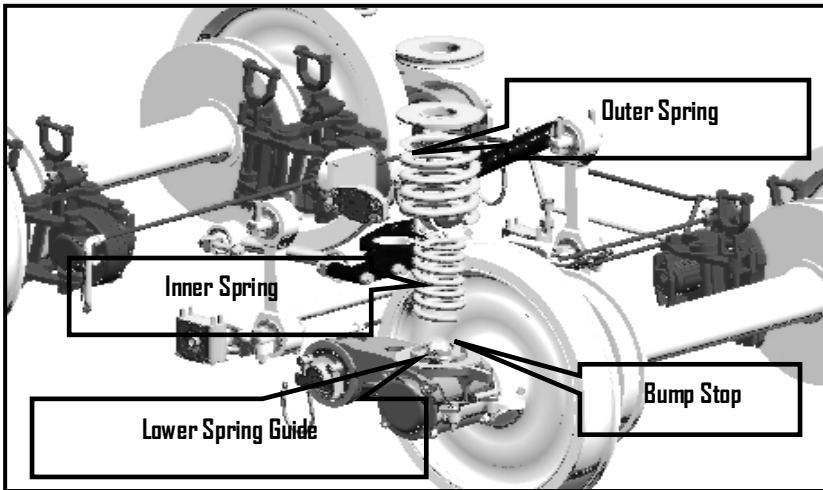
A Exploded View of Bogie Frame Lifted
